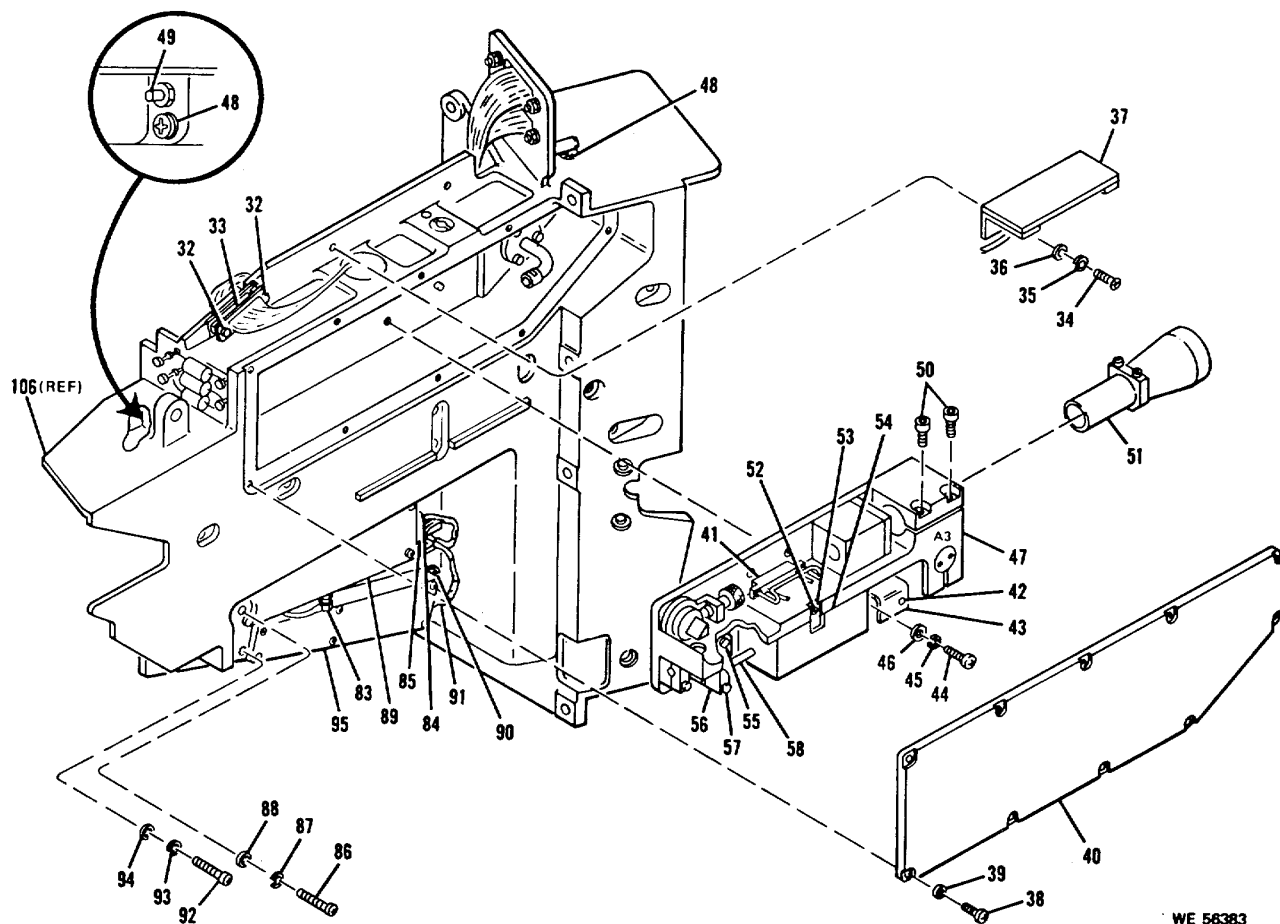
Disassembly of Laser Receiver-Transmitter RT-1021/VVG-1 (A76) (Sheet 3 of 3 sheets).
